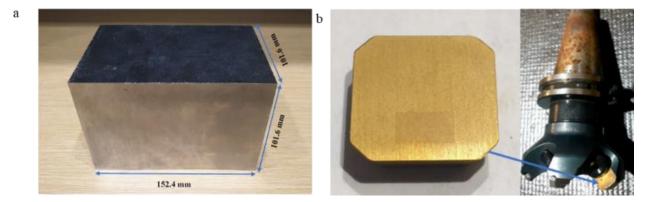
(a) workpiece; (b) cutting insert and tool holder.
